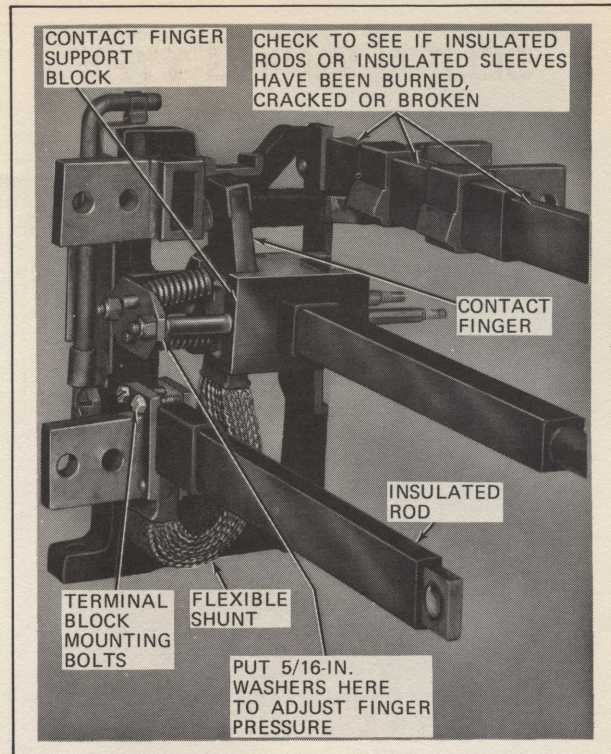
LOWER END FRAME AND PARTIAL ASSEMBLY OF CONTACT AND SUPPORT PARTS.
